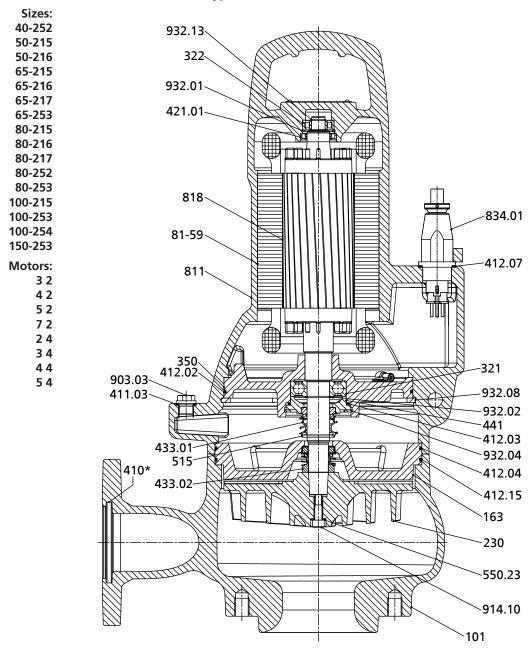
General assembly drawing Amarex KRT, motor type 1
